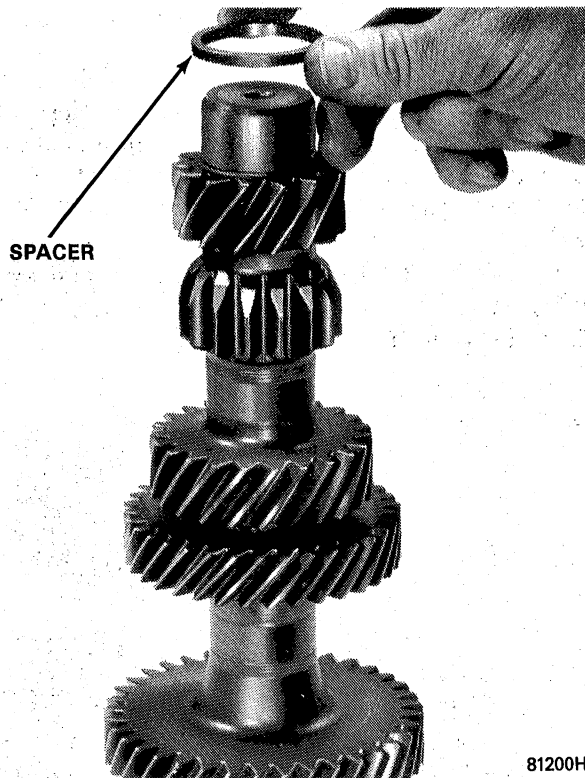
B-18 Countershaft Rear Spacer Removal/Installation
